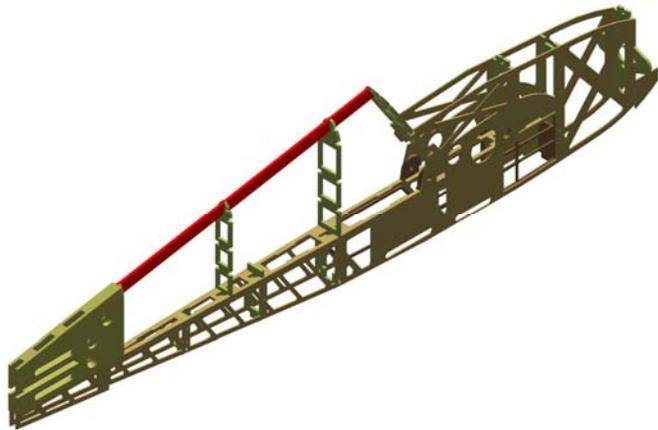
Install main fuselage stringer. See balsa sheet 9.
